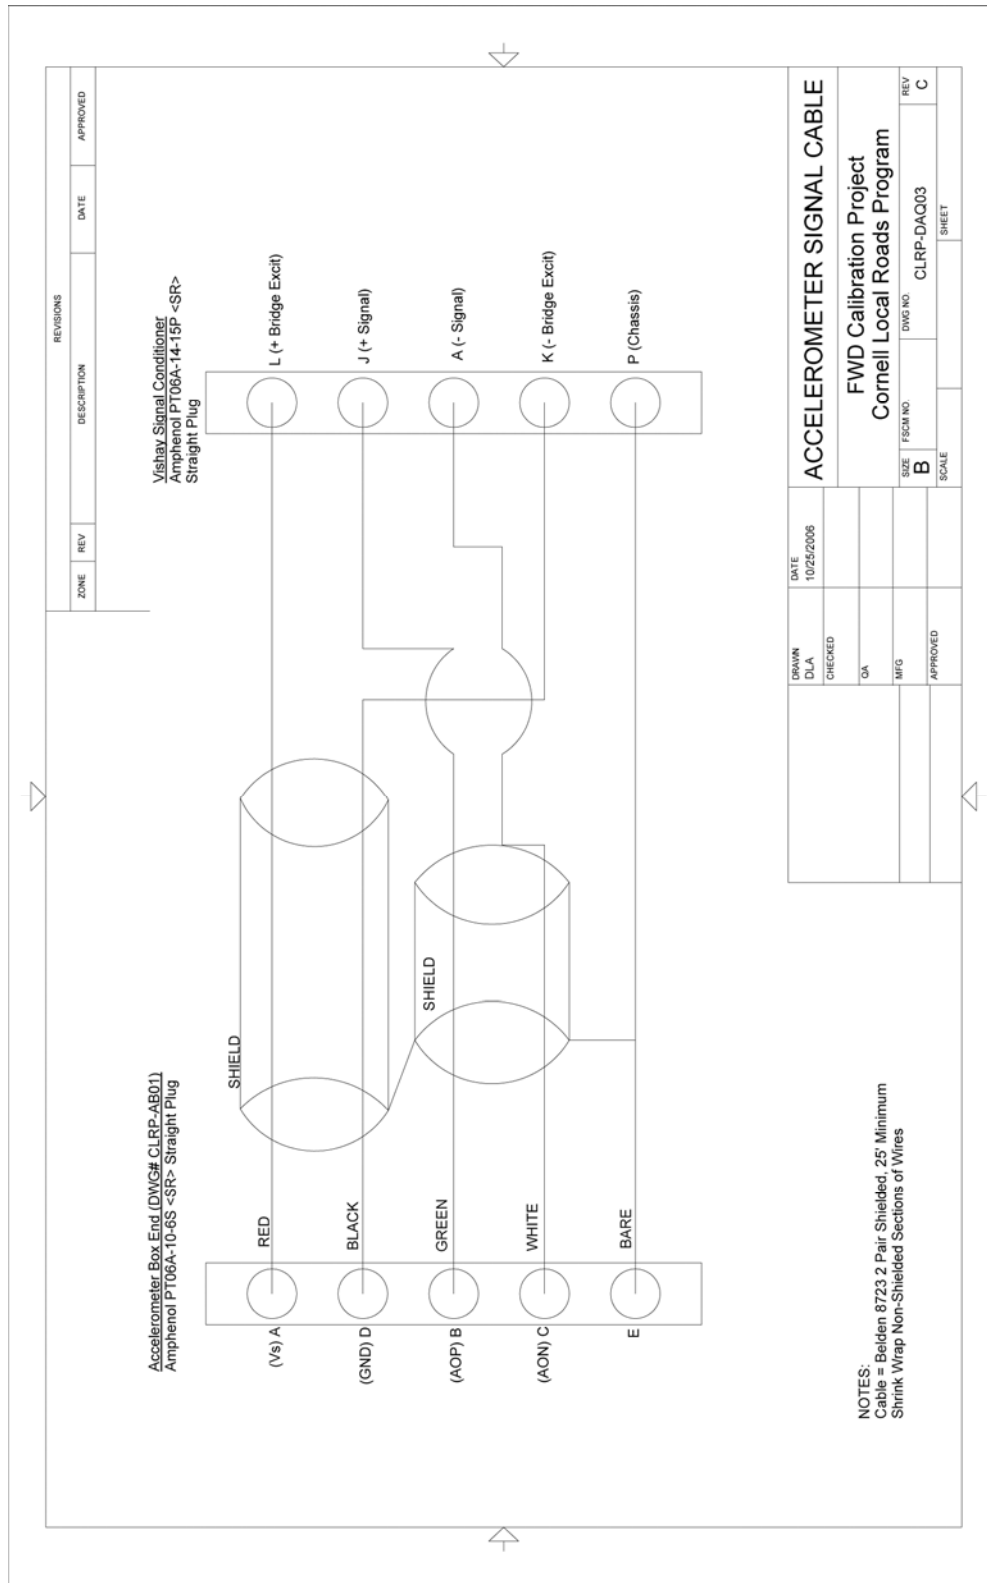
Drawing. CLRP-DAQ03 Accelerometer Signal Cable.
